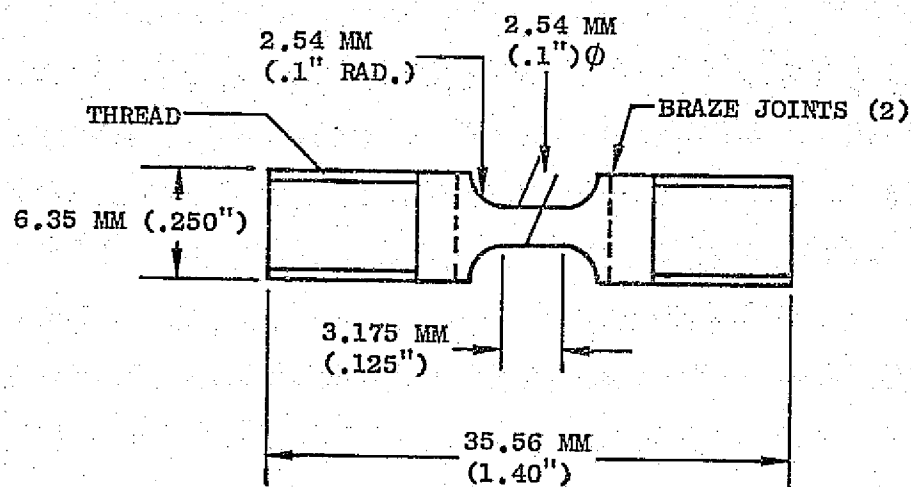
Assembly and Preparation of Modified Transverse Test Specimens
